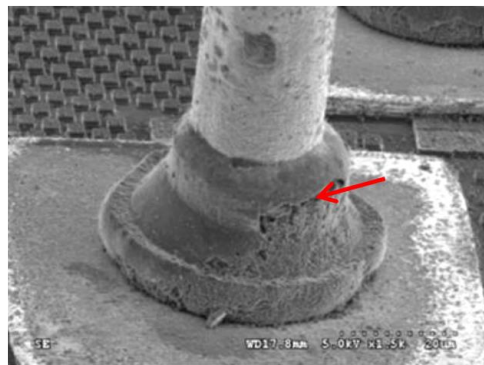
Pitting on the Cu wire ball surface due to corrosion.
